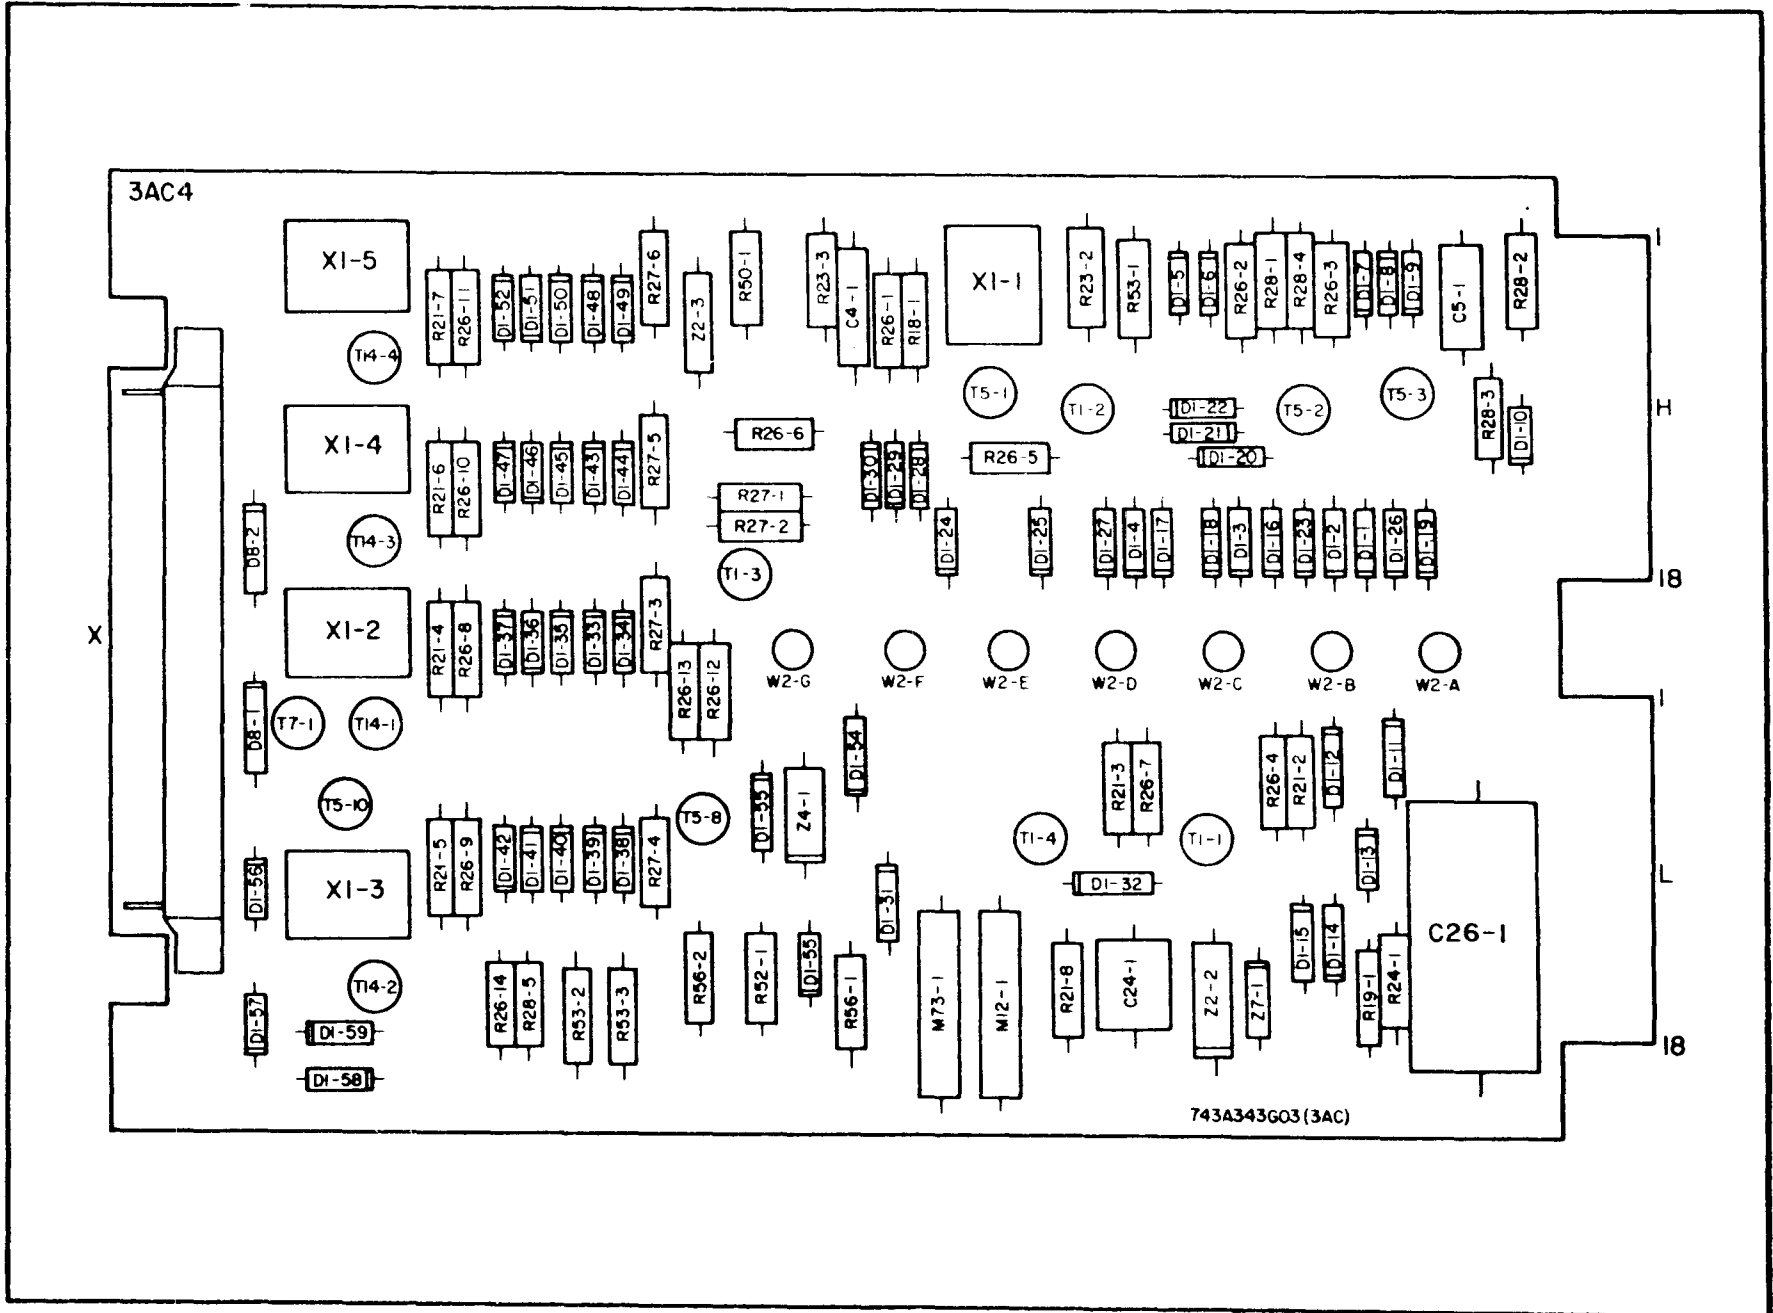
3AC4 ASSEMBLY (REF. DWG. 743A343, SUB 18)
